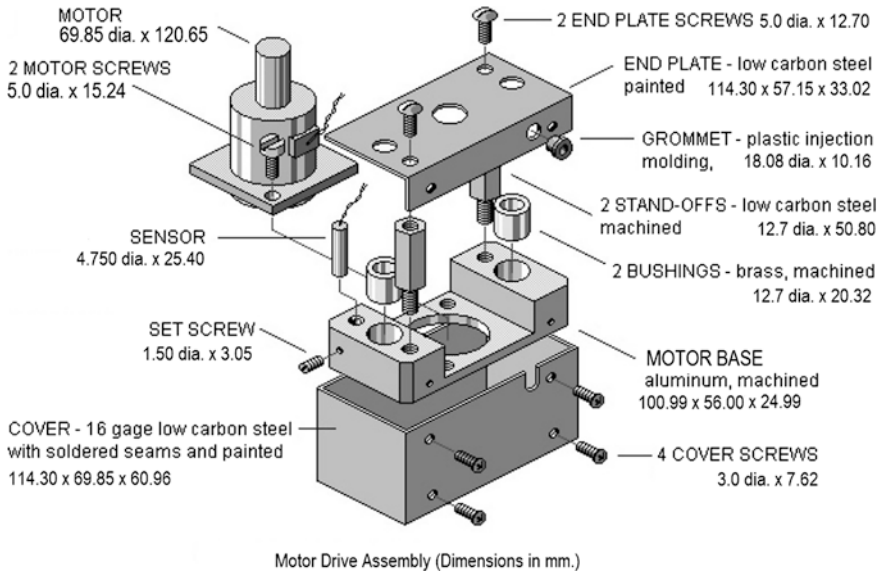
A motor drive assembly (Design for assembly user guide 2009)
